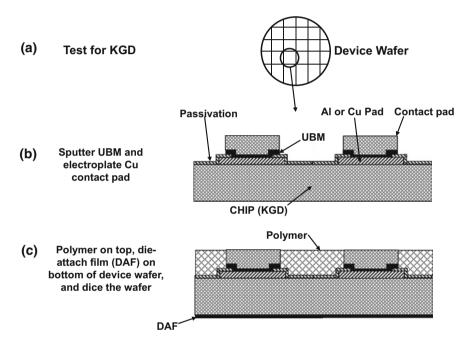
Manufacturing process for packaging the application processor chipset
